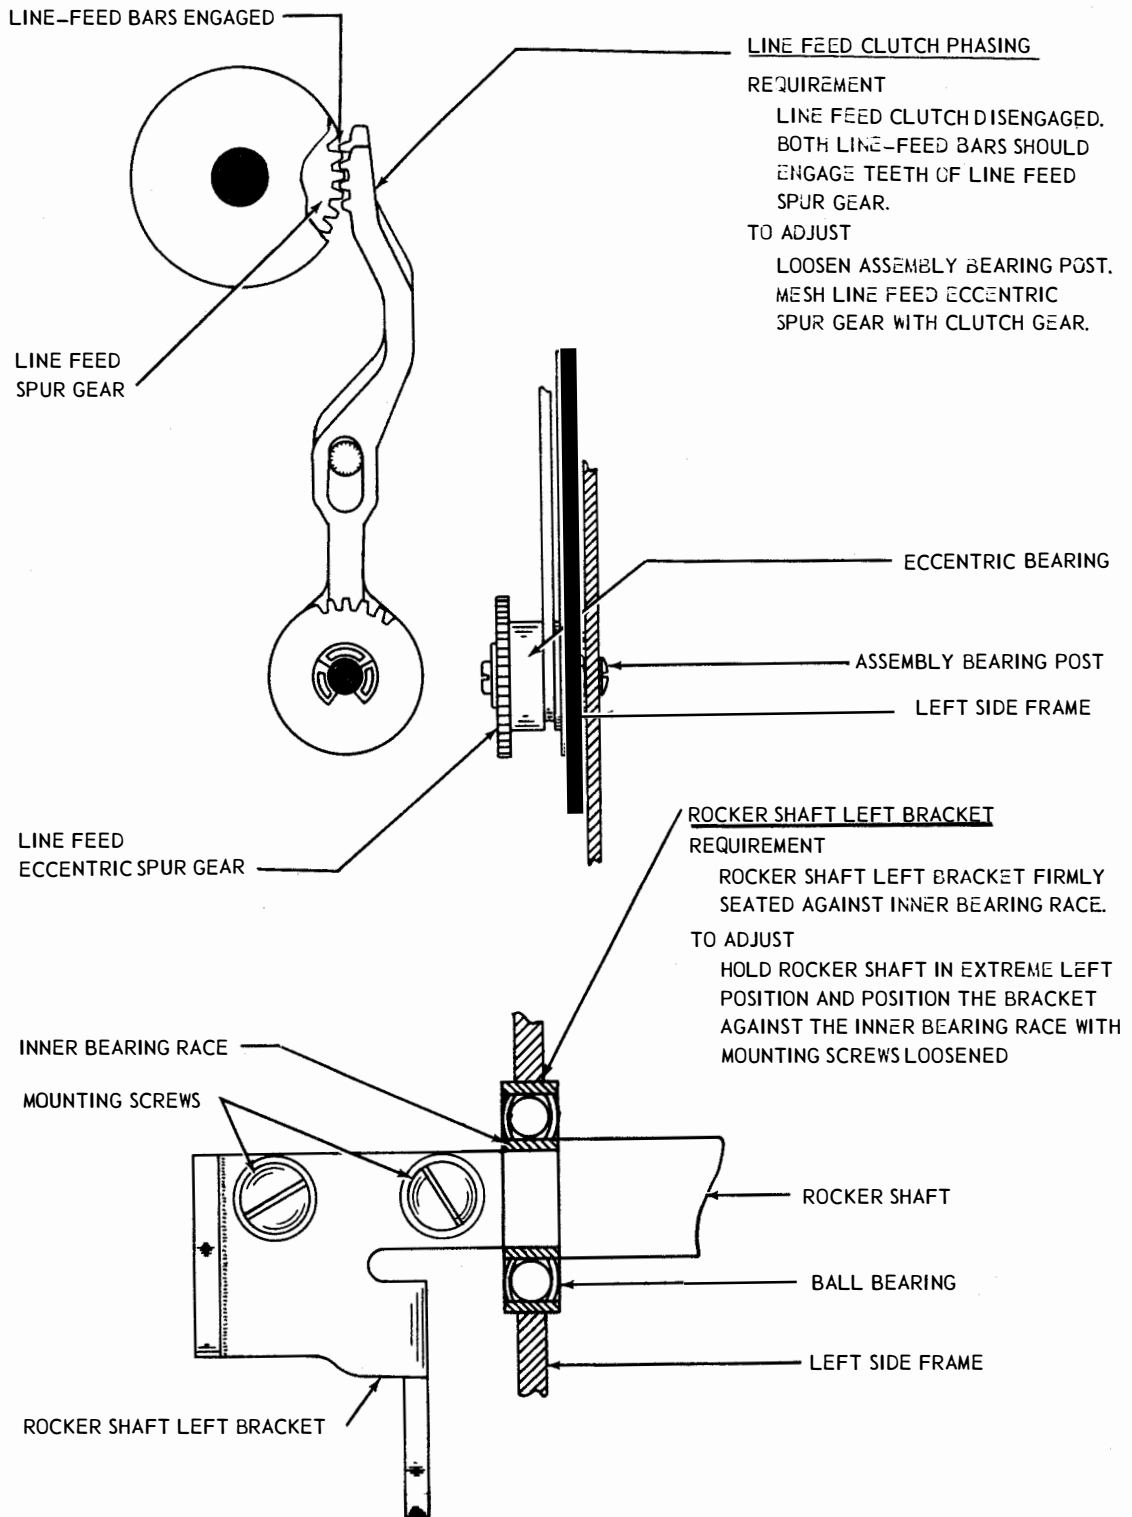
TYPING UNIT, LINE FEED AND ROCKER SHAFT MECHANISMS
